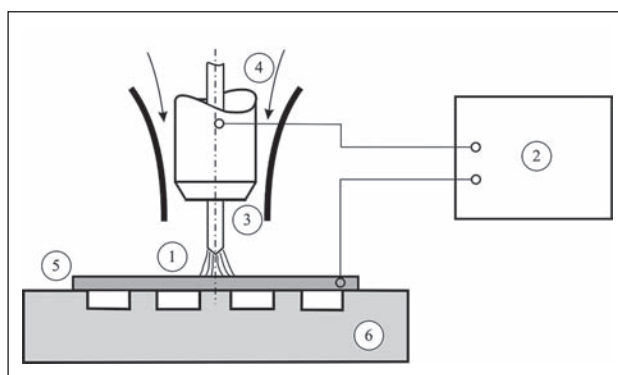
Experimental setup: 1 – arc, 2 – power source, 3 – W-electrode, 4 – shielding gas, 5 – workpiece, 6 – welding table
